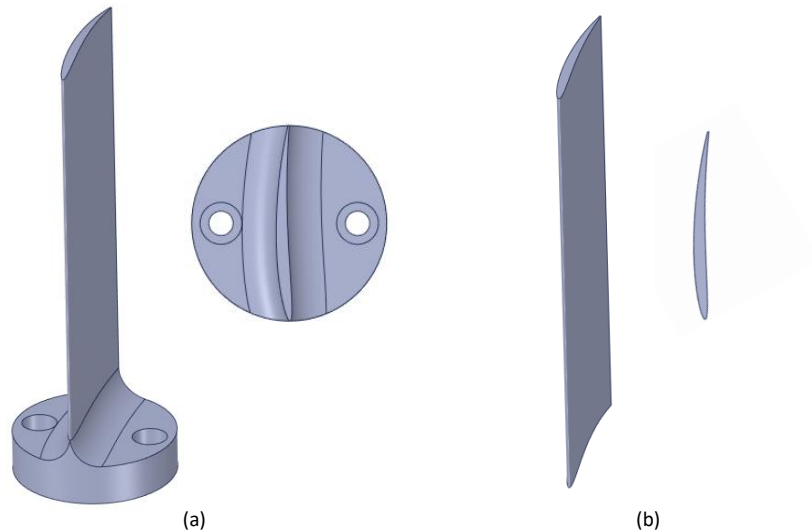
Rotor blade: Physical blade with base (a); Defeatured blade (b).
